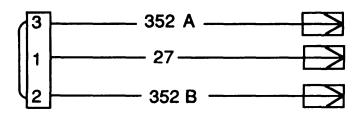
Low Coolant Indicator Light Assembly and Wiring Harness (12260297)
